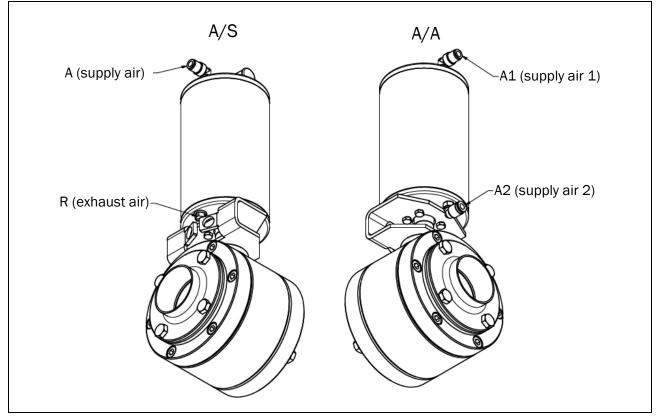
Ball valve with pneum. actuator: Control air connections
